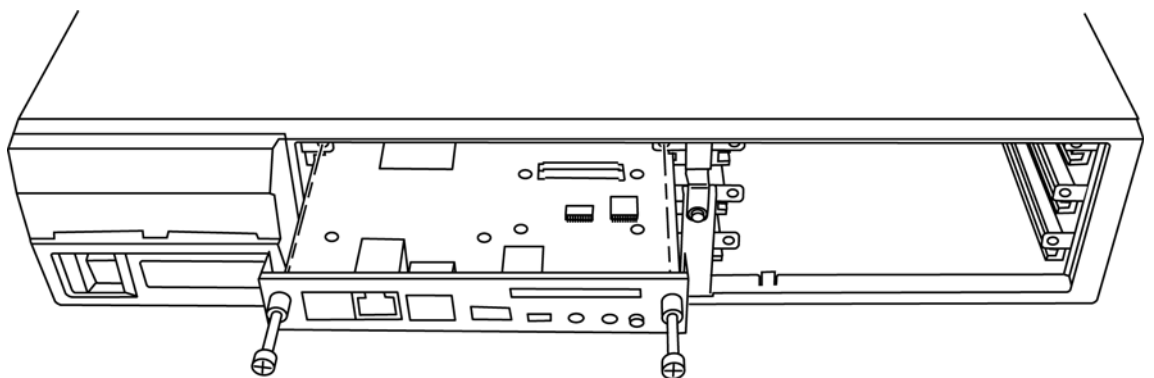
Inserting Blades in the 19" CHS2U-AU Chassis
